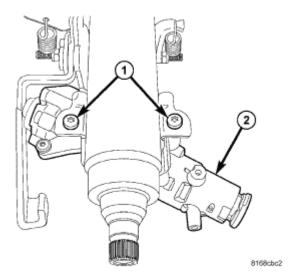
Identifying Screws & Lock Cylinder Housing Courtesy of CHRYSLER LLC
